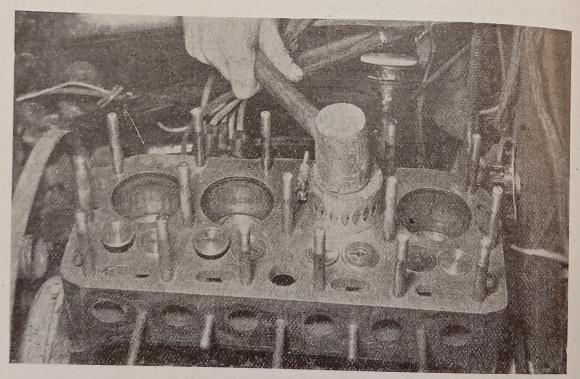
FITTING WELLWORTHY RINGS Driving the piston fitted with Wellworthy rings out of the piston-cuff into the bore.
